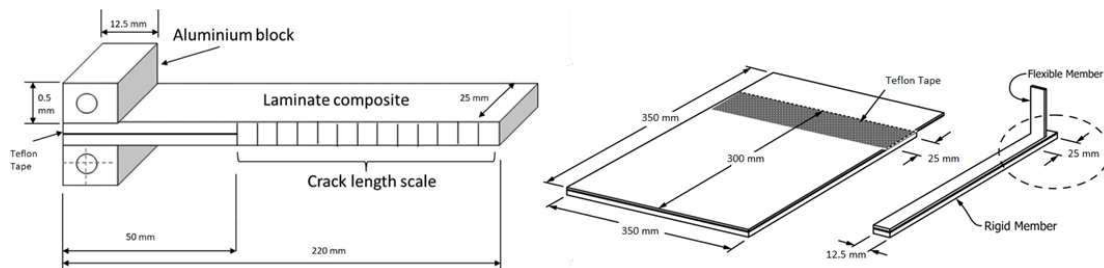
(Left) DCB and (Right) Peel test specimen dimension
